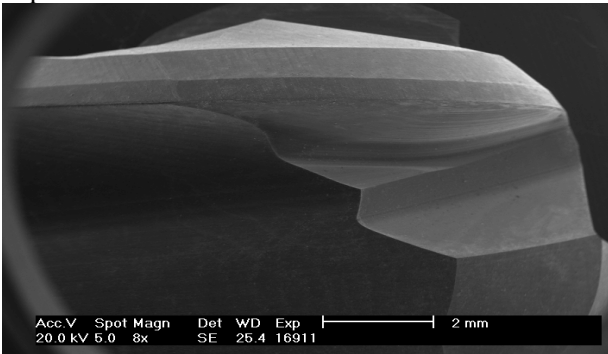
Micrograph of a surface of the coating deposited tool at 50x
